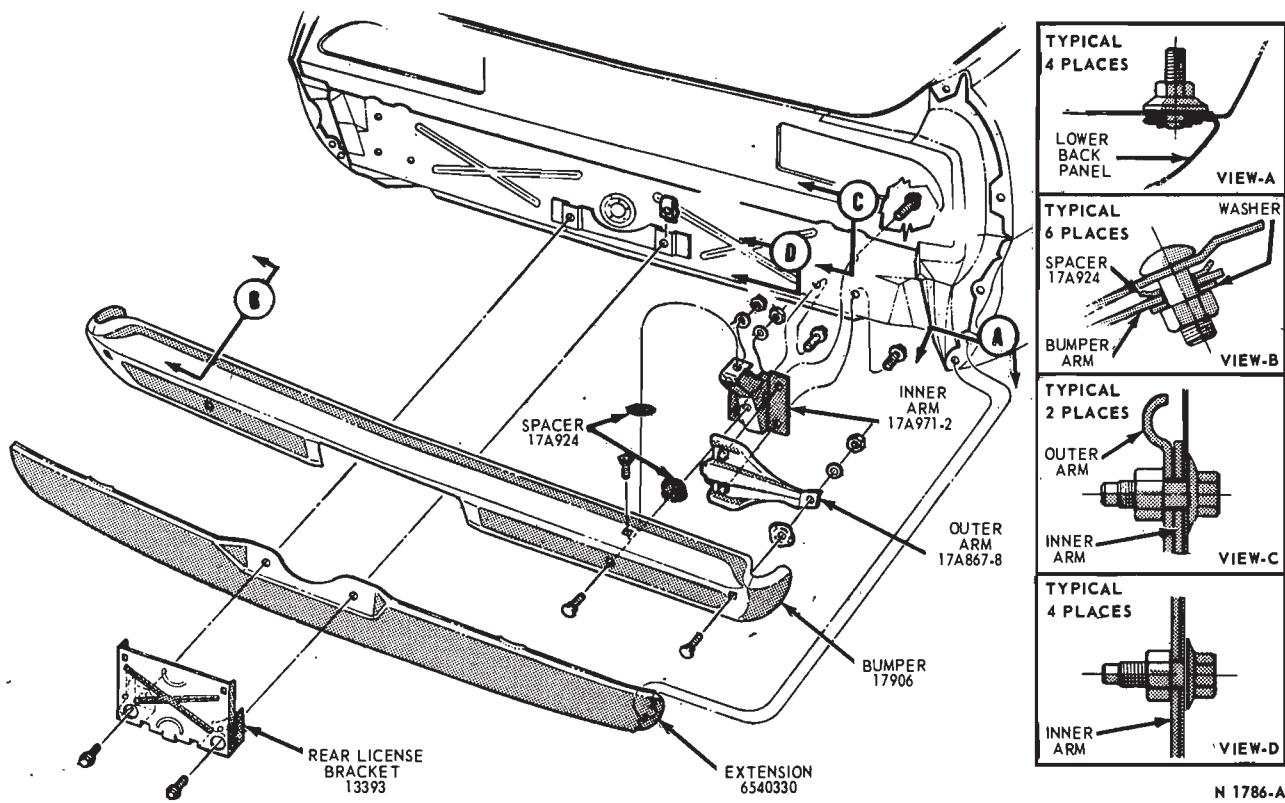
Fairlane Rear Bumper Except Models 66 and 71
